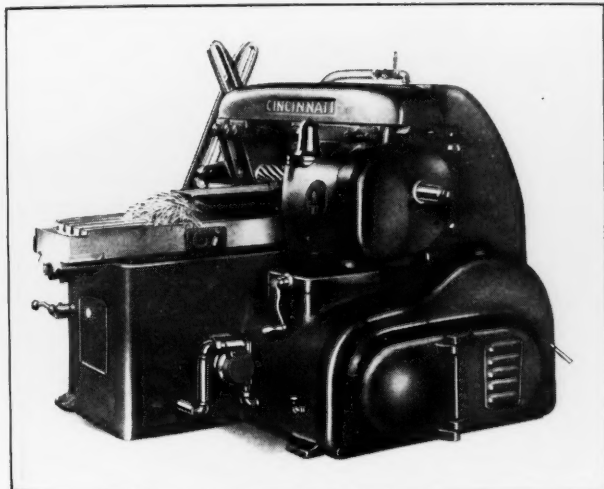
Rear View of Machine, Showing Enclosed Motor Drive
